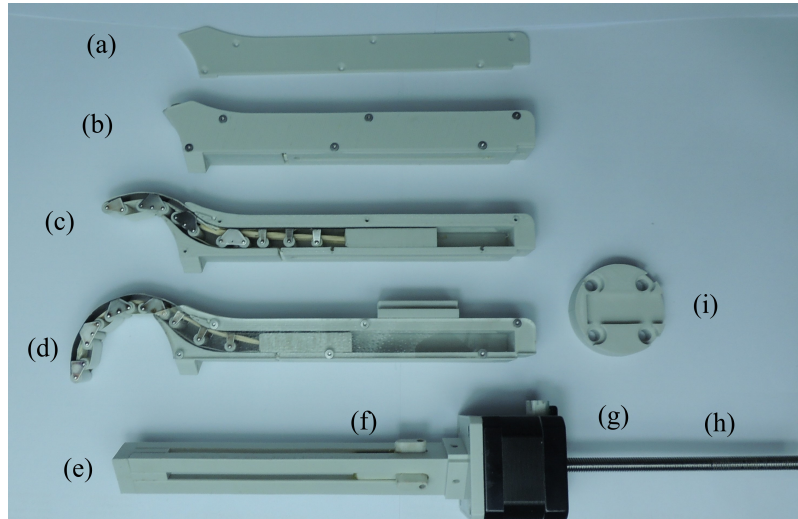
Disassembled gripper, showing the separate finger modulus in various extension states and different covers. Parts and modules are labeled as: (a) PLA cover (b) PLA-covered completed fingermodule (retracted) (c) Open finger module (partially engaged) (d) Transparent-covered completed finger module (engaged) with arm-connector block (e) Triangular middle hub (f) slider block with protrusions (g) Actuator (h) spindle (i) arm-connector plate.
